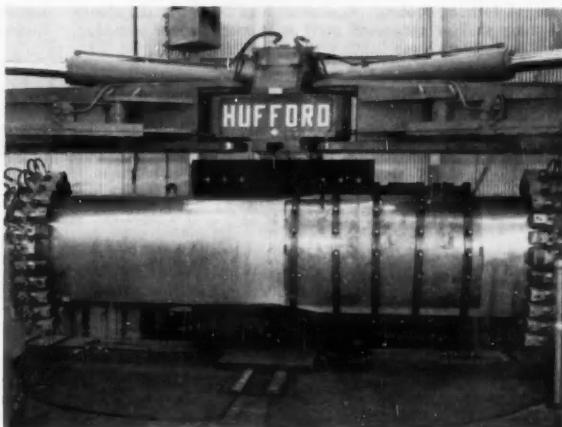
Sculptured fuselage skins are being successfully finish-formed on stretch wrap forming machines
